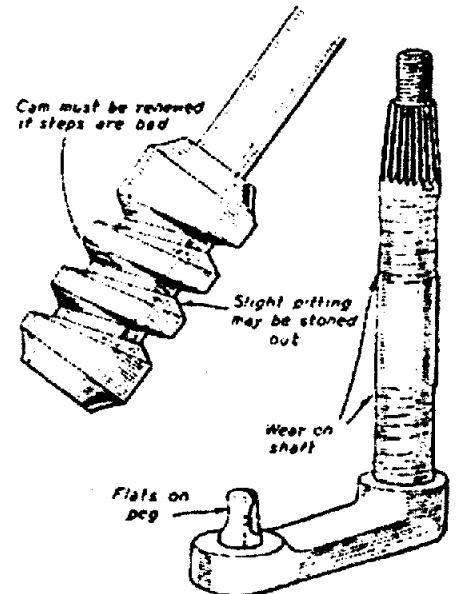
Points where wear is most likely on cam and rocker assembly.
